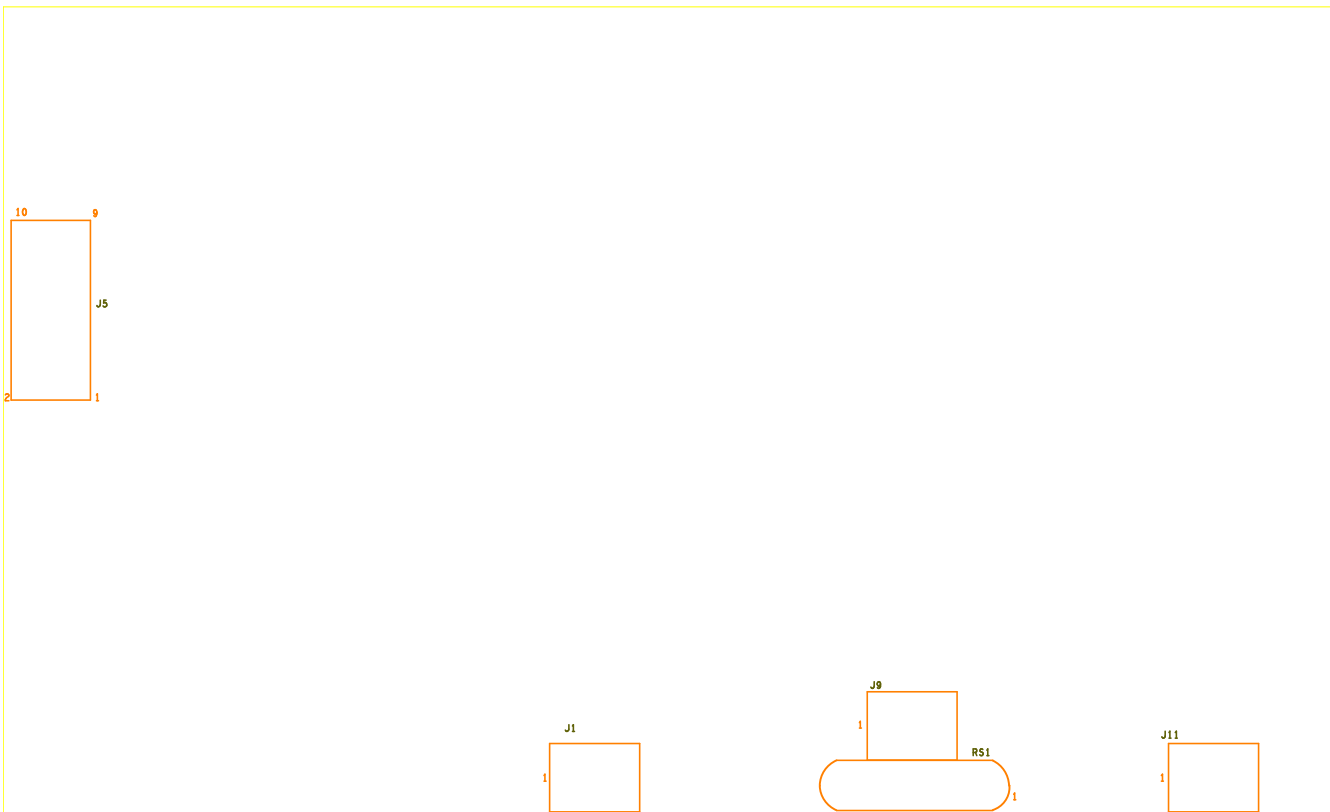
Bottom Side of the PCB with CT Low-Cost Configuration
